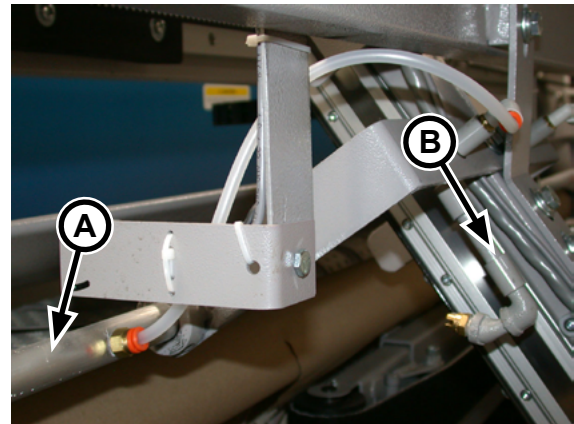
The air bar/air jet helps lay flatwork on the discharge conveyor ribbons.
